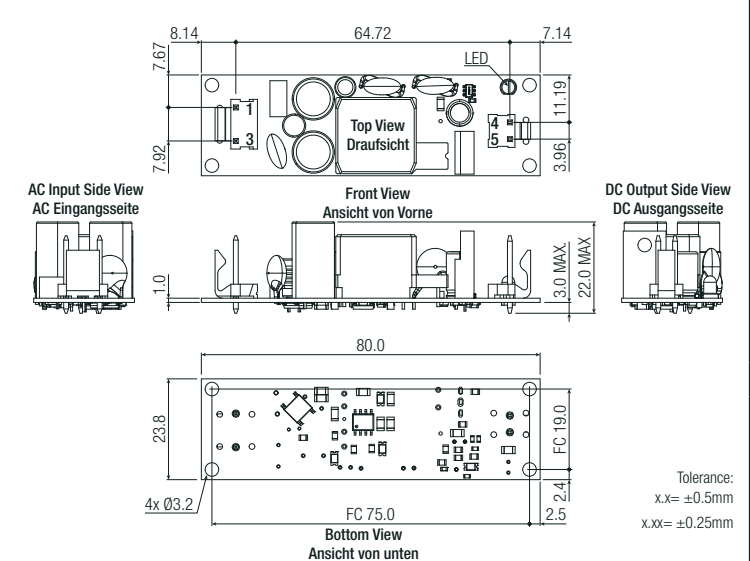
Mechanical Dimension / Mechanische Dimensionen [mm]
